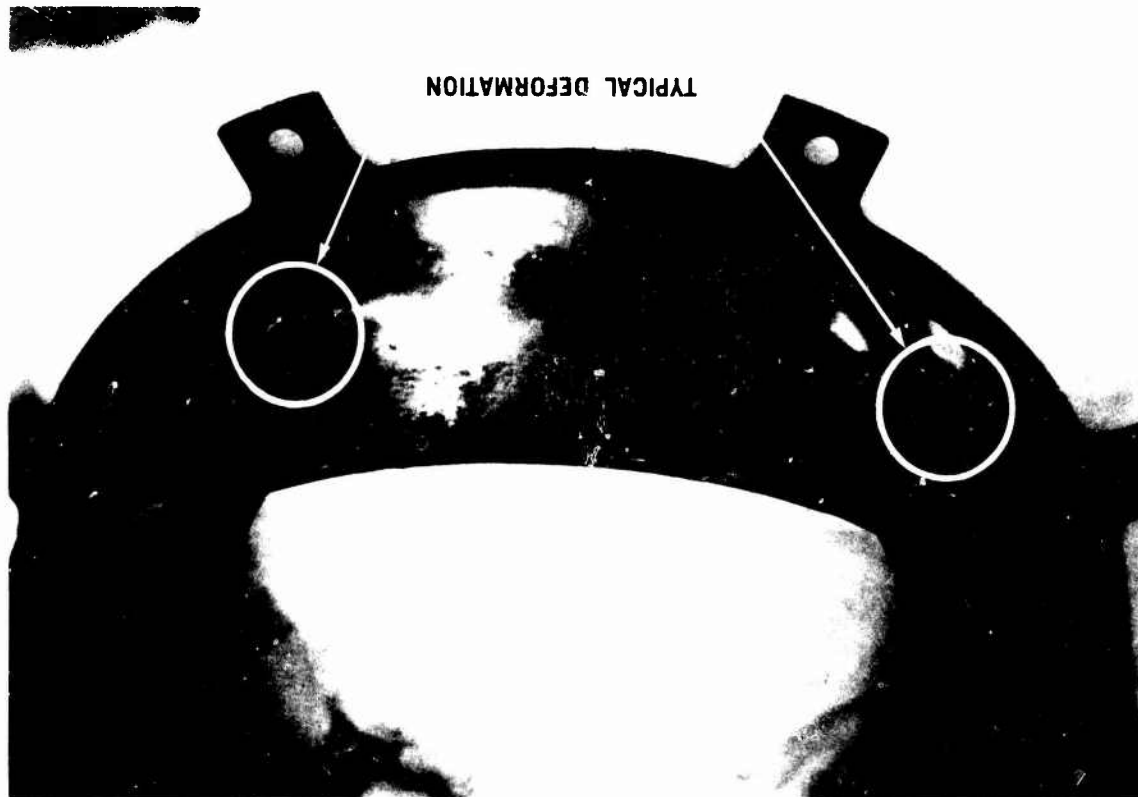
Stainless Steel Insulator Shell After Full Speed Rotor Burst (Ceramic Fiber Insulation Removed)
